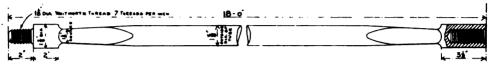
Bore Rods of Tubing with Solid Ends.
